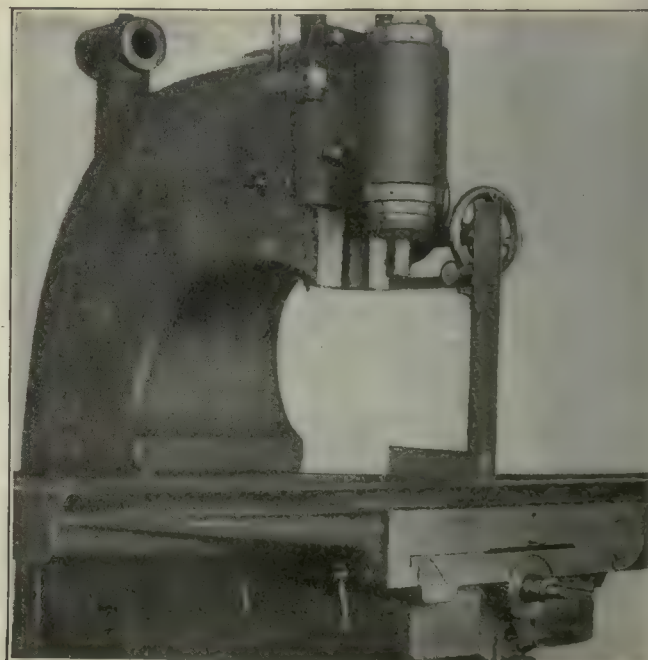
TESTING ALIGNMENT OF SPINDLE-SLIDE FACE WITH COLUMN FACE
